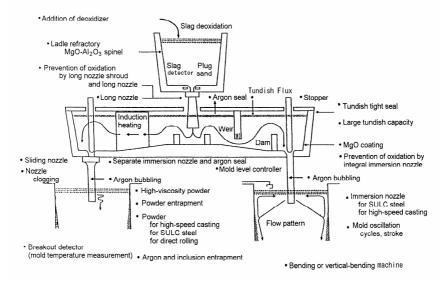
Continuous casting system (ladle, tundish, and molds) with all devices and precautions for casting clean steel. (SULC: Super ultra low carbon) [Ref. 7]
